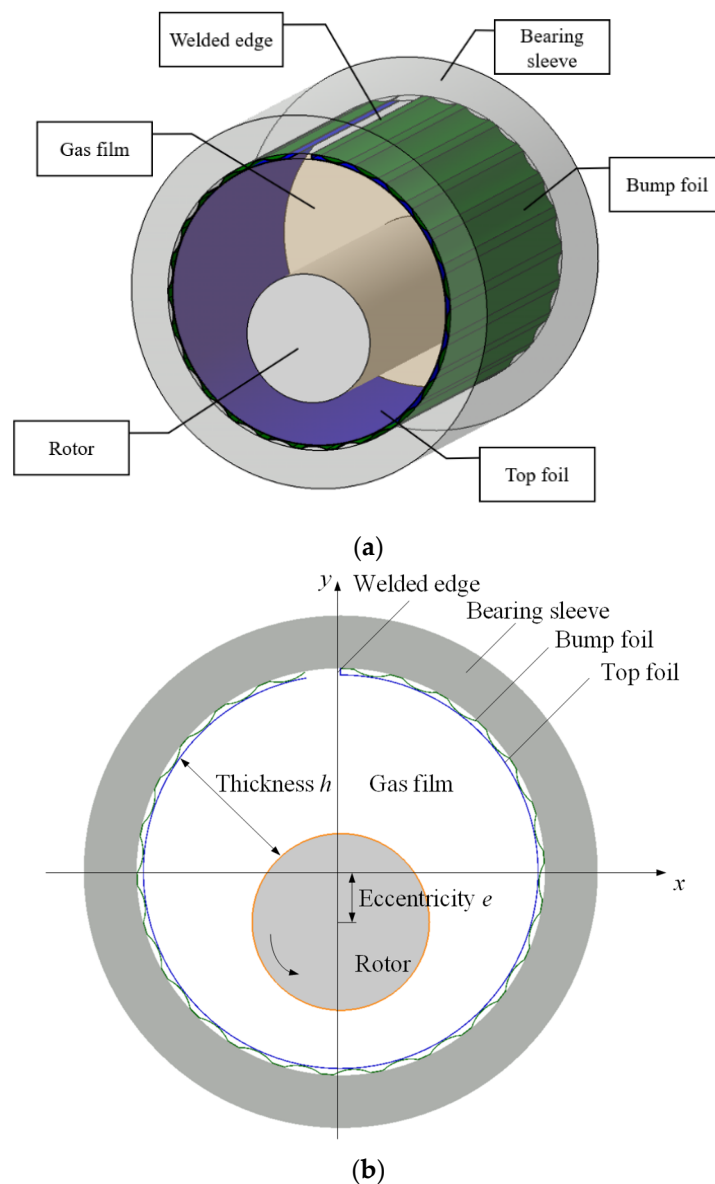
Scheme of the multi-leaf compliant foil bearing. (a) Foil journal bearing. (b) Schematic diagram of foil journal bearing.
